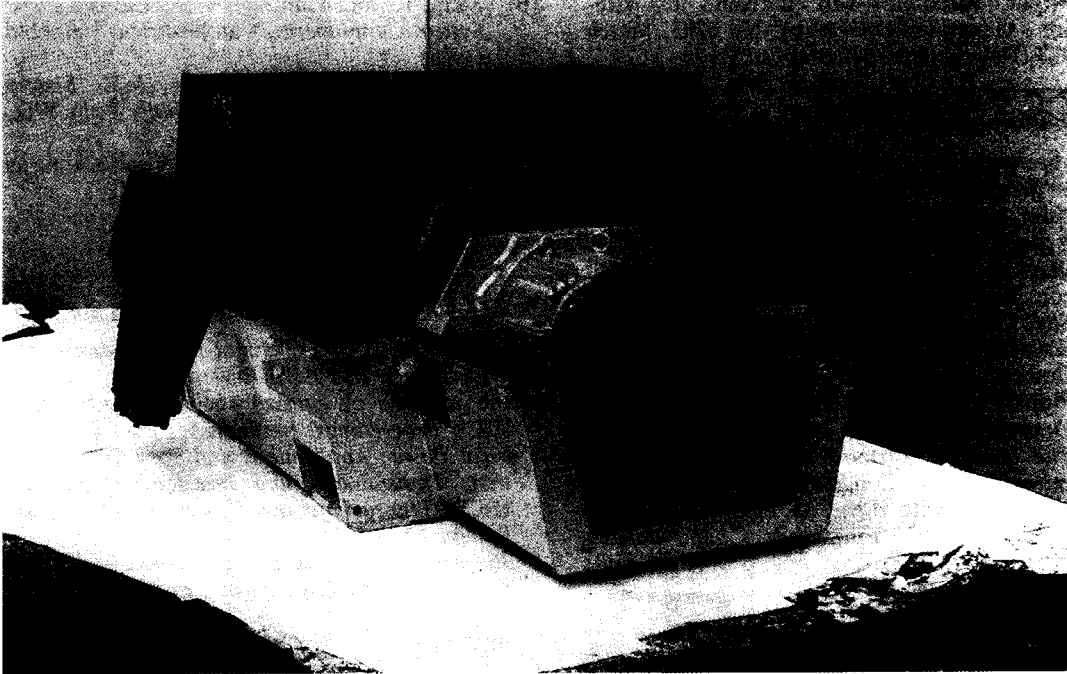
Assembled generator, showing brushless exciter components (Courtesy: GEC Alsthom Large Machines Ltd.)
